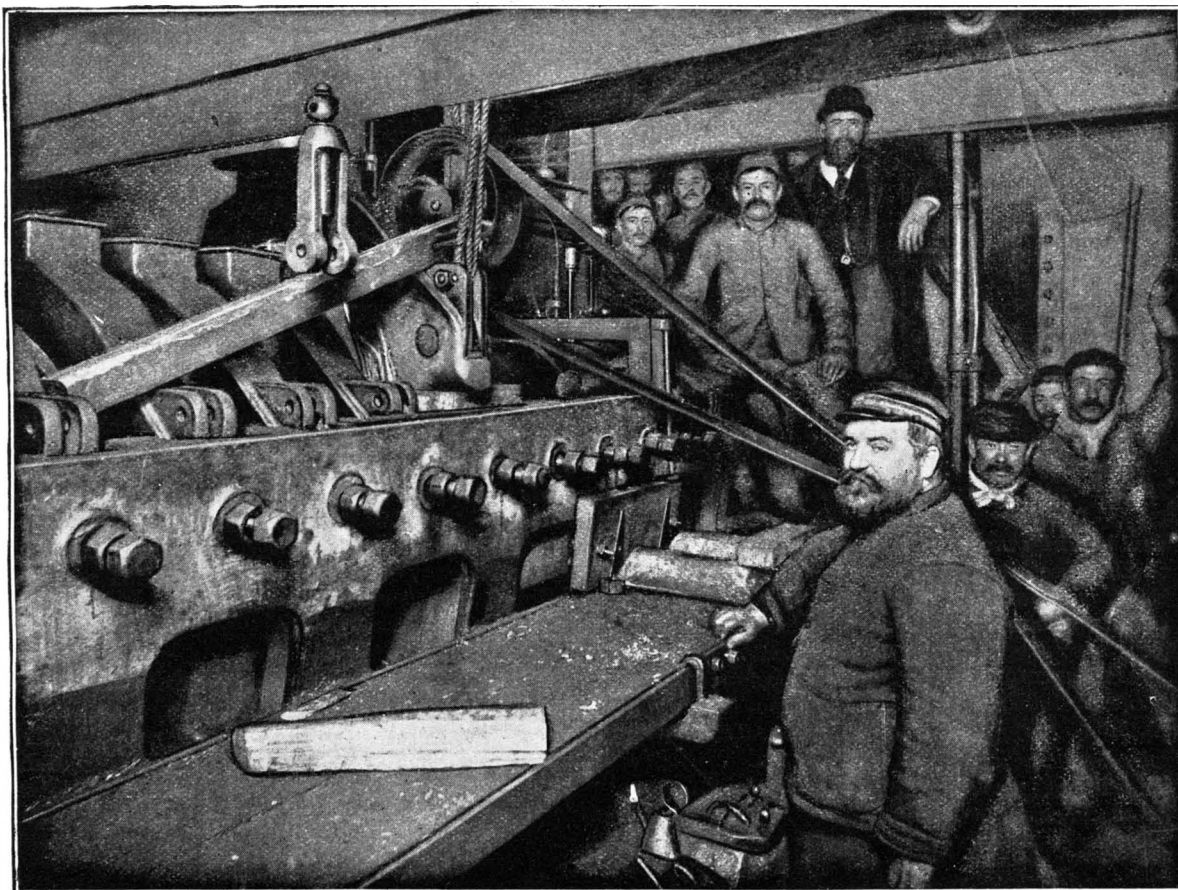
STEAMER UMBRIA—THE DUPLEX DRILLING MACHINE AT WORK.
